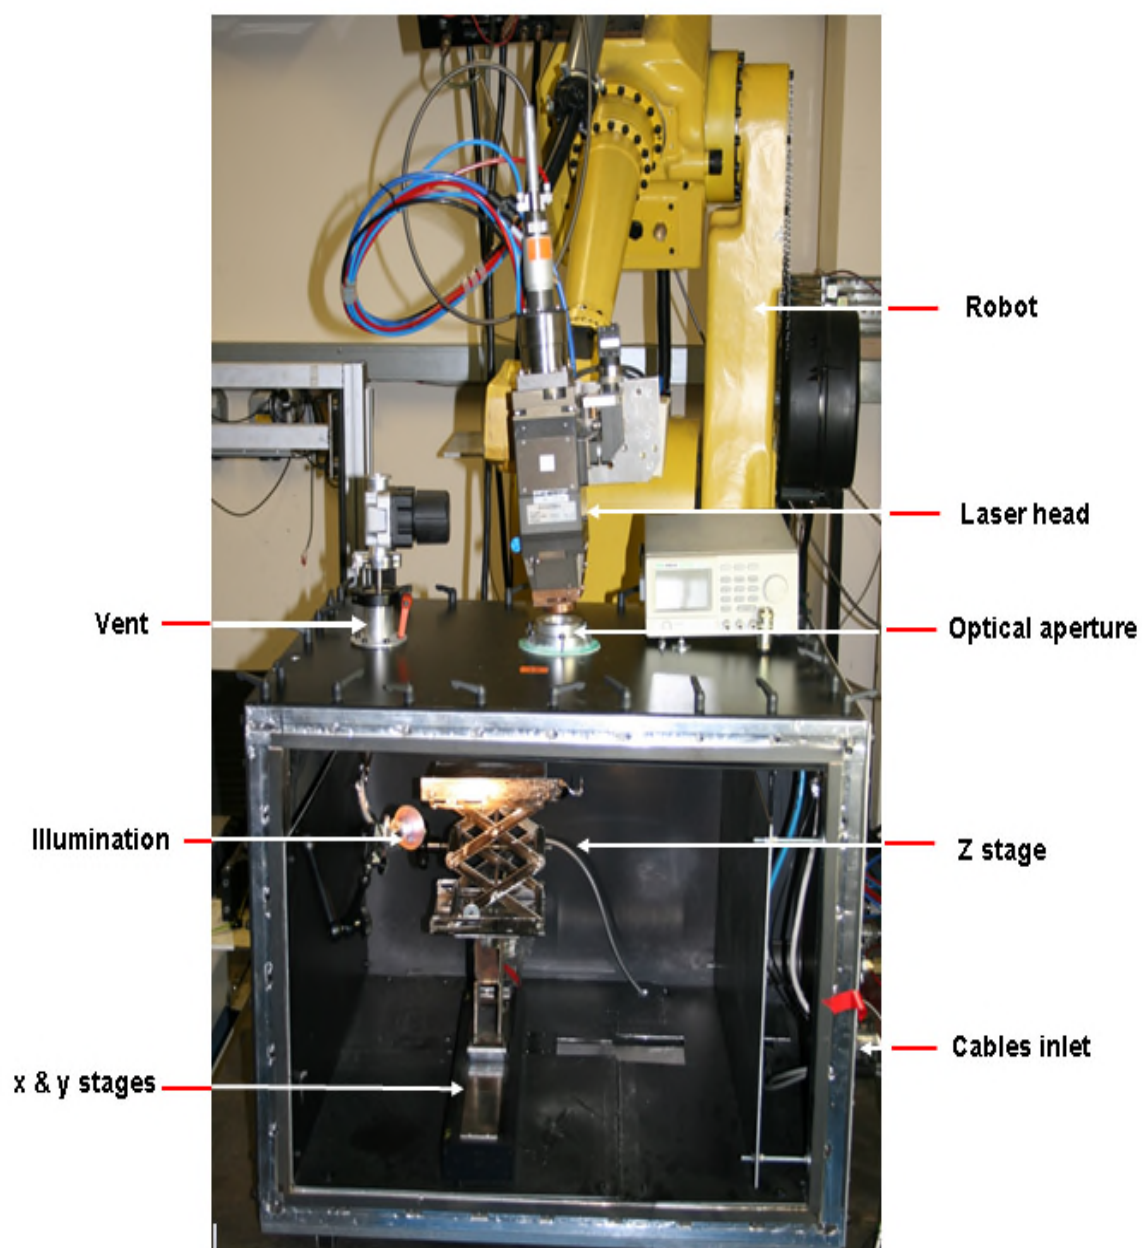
Experimental set-up used for laser welding
